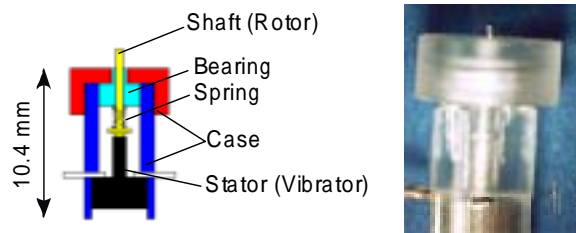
Cross-sectional view and photograph of the macro model for micro ultrasonic motor using cylindrical bulk piezoelectric vibrator
